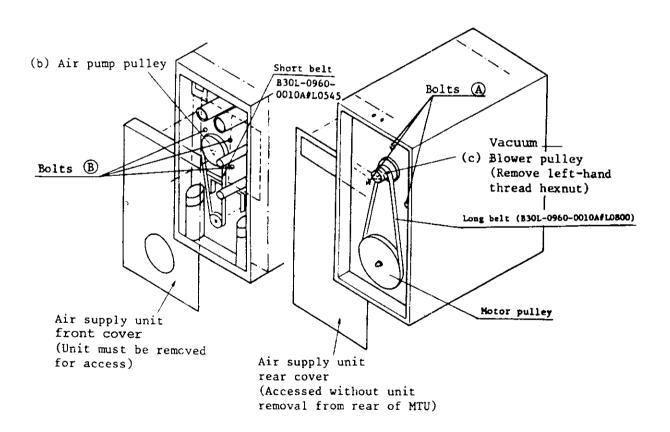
Air supply unit: vacuum blower and motor pulleys (1)
